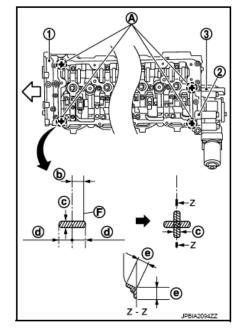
Identifying Liquid Gasket Applying Areas Of VVEL Ladder Assembly And Actuator Bracket (Rear)
